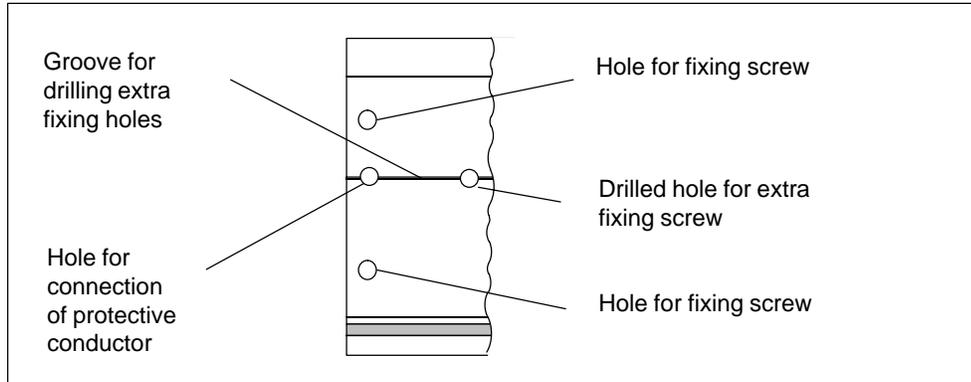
Fixing Holes of the 2 m/6.56 ft. Rail
